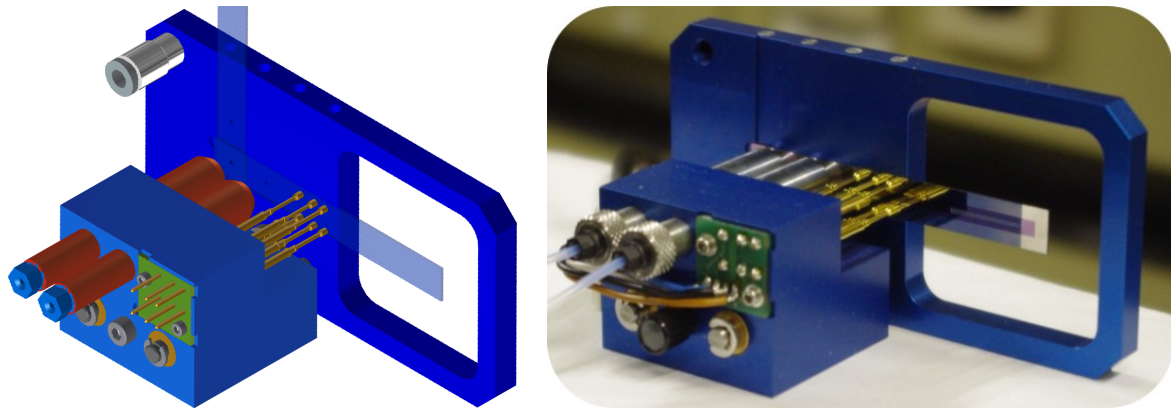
Design drawing of the support and photo of the final product with a mounted gas phase chip. (Images by GeSiM and A. Rochet respectively)
